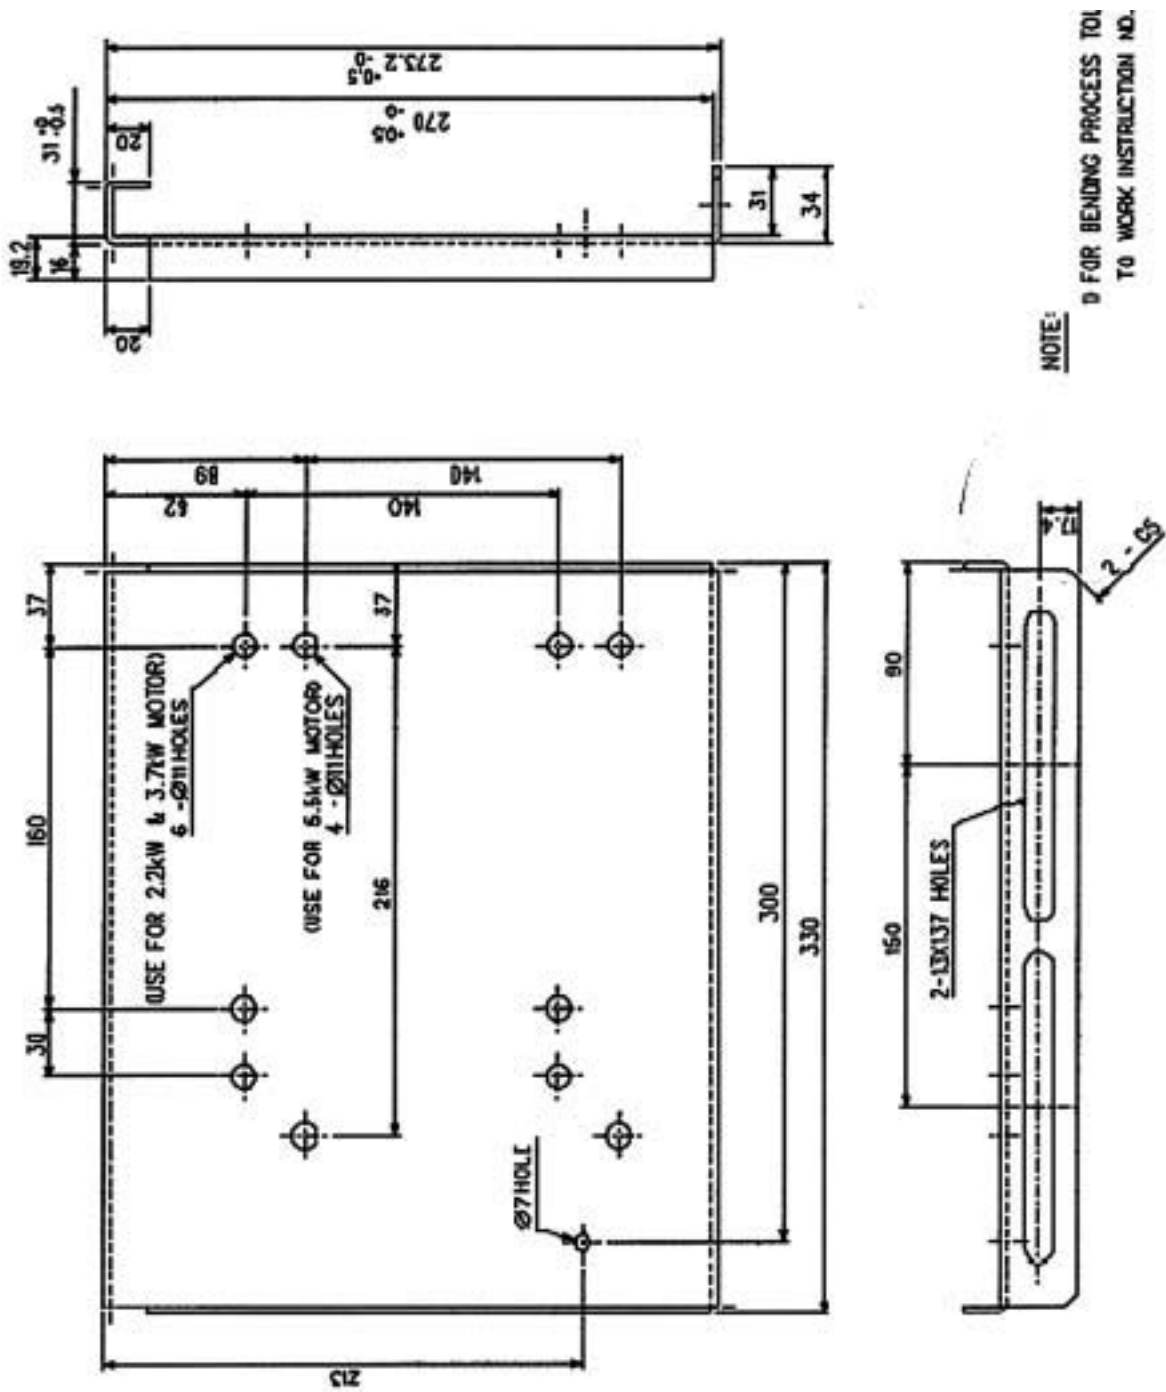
(b) Motor Mounting Base for UATP/TYP/T/TY450/560A
